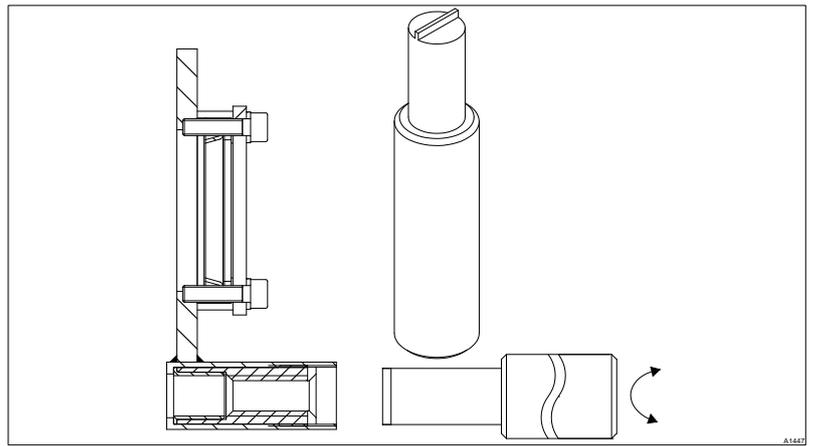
Tool for the threaded sleeve in the wiper mounting, part number 1037738
